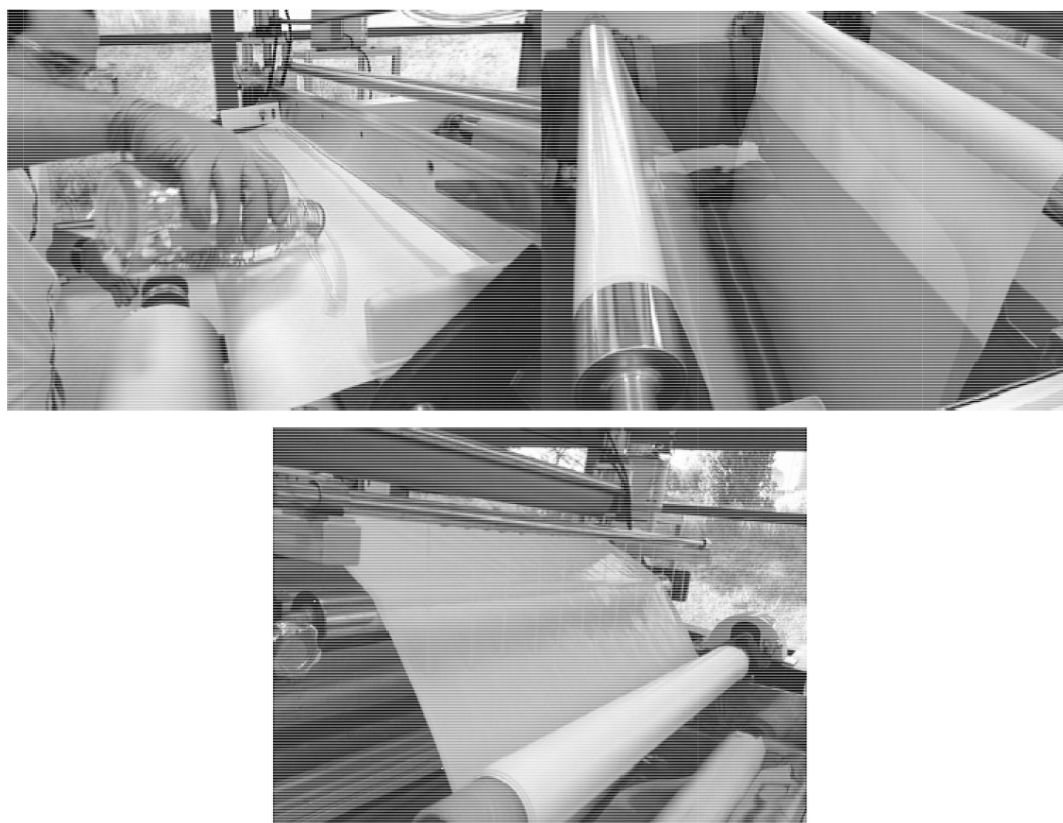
Production of PSf support layer membranes using a pilot scale casting machine.
